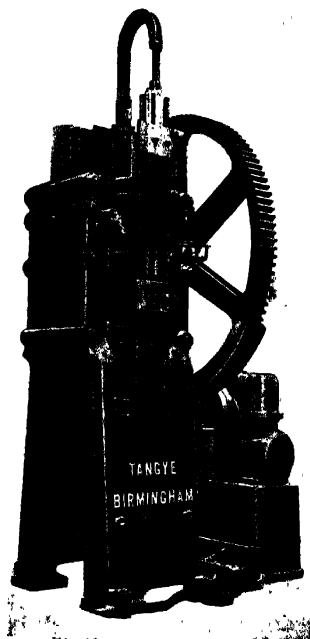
Long-stroke twin-rack drawing press for shell cases.
